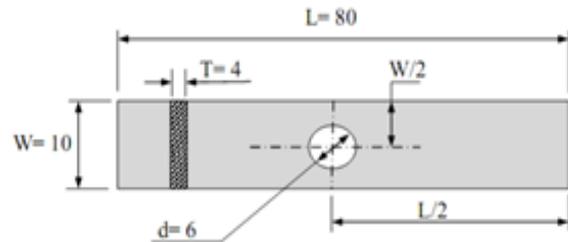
Test sample drawing for dimensional Analysis (all dimensions are in mm)
